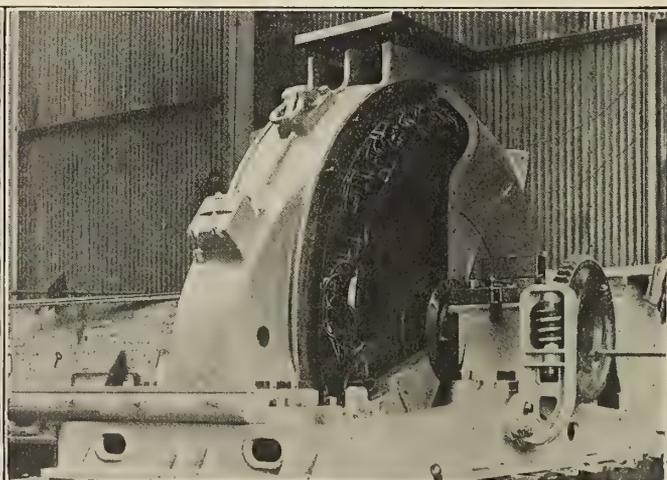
MOTOR WITH GUARD REMOVED TO SHOW WINDING
